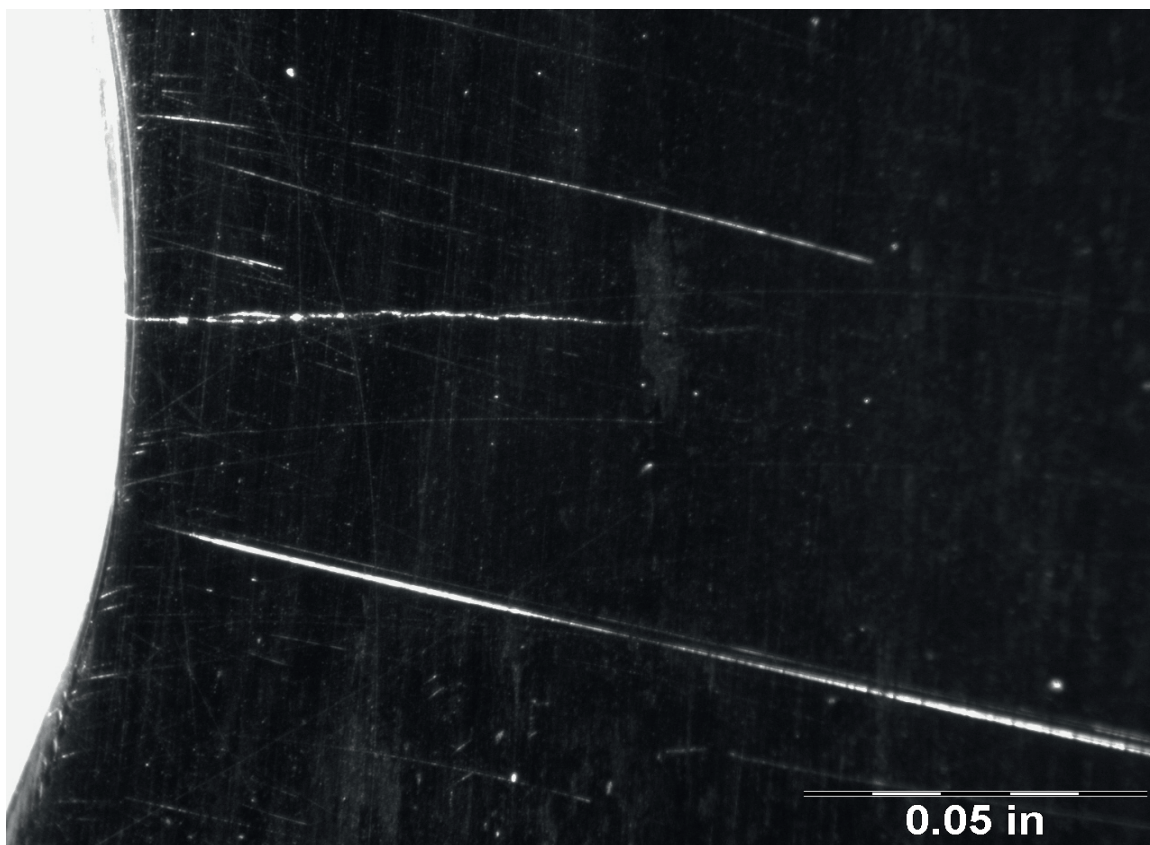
Image of Surface Crack in Coupon Cx4N1-04-D, Surface Crack Length is 0.1015 inch.
